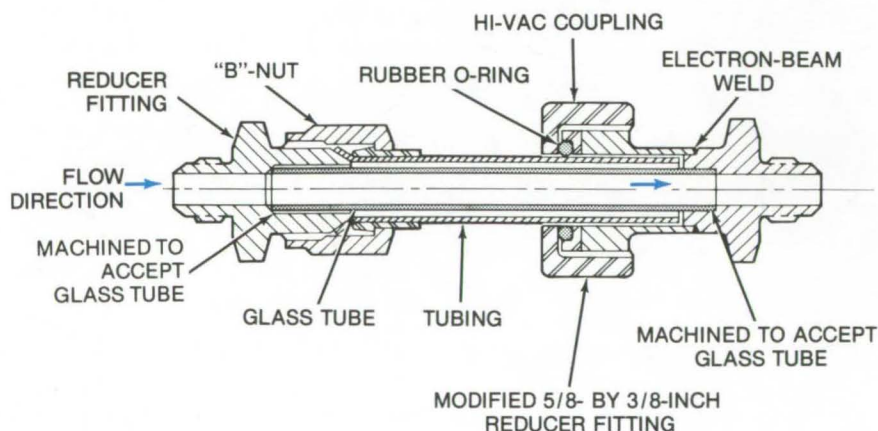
The Contamination Capsule and Holder assembly is constructed with stainless-steel fittings and tubing except as noted.
